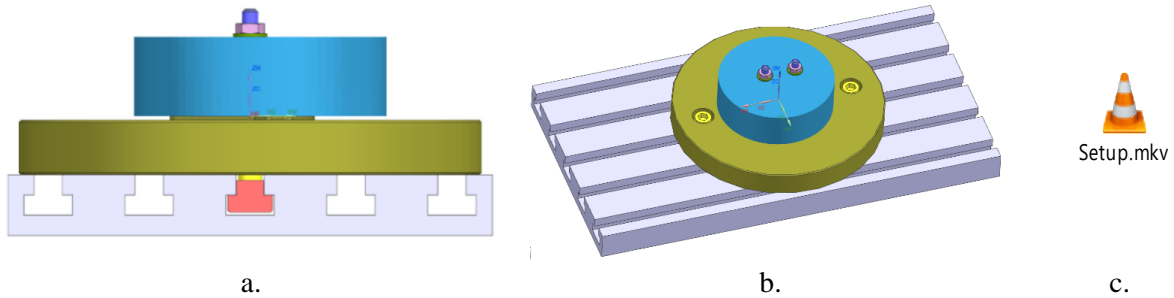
Fixture with workpiece (a, b); Set-up (c)
